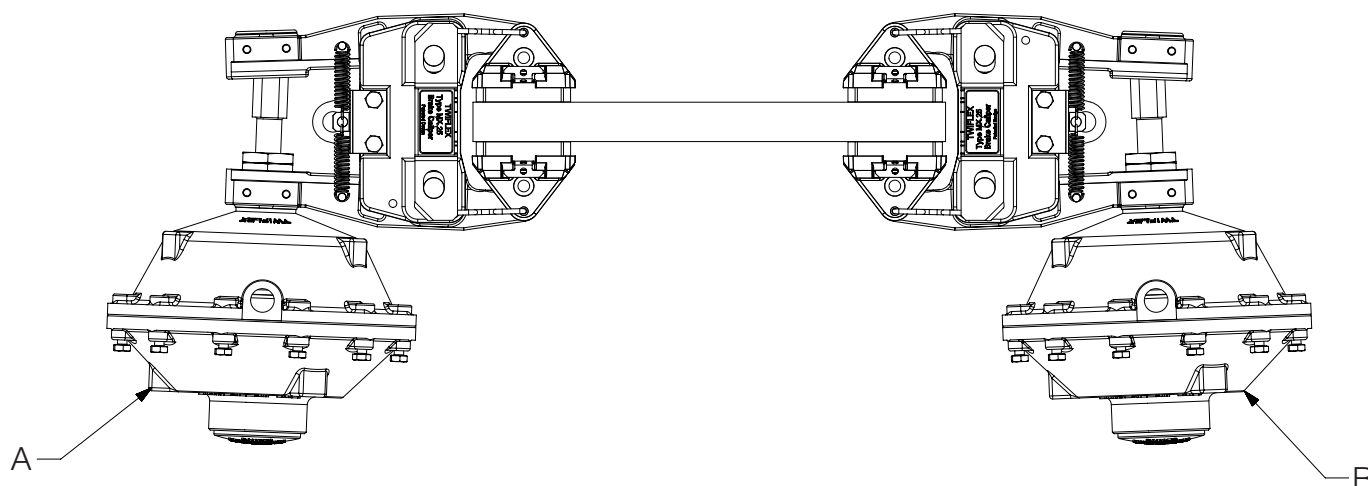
(A) Right-hand and (B) left-hand assemblies
